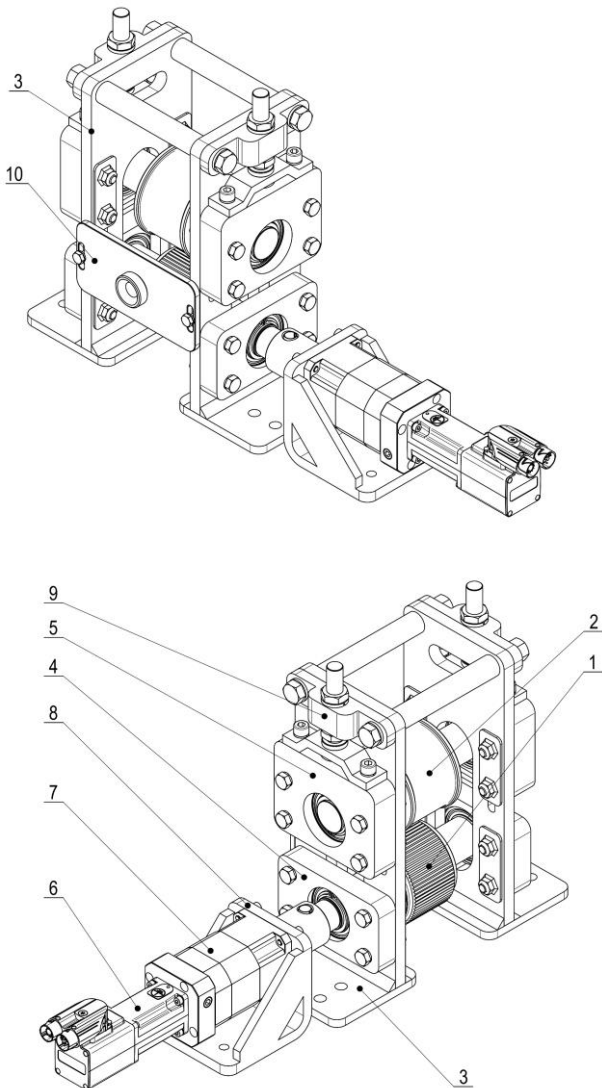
Roll feeder: 1 – powered roll, 2 – pressure roll, 3 – case, 4 – bearing assembly, 5 – hold-down device bearing system, 6 – servomotor, 7 – planetary gear reducer, 8 – drive system bracket, 9 – hold-down pressure adjustment mechanism, 10 – cord guide
